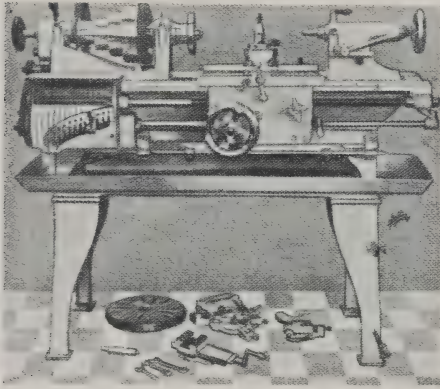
6 IN. LATHE WITH SPECIAL CHANGE GEAR.
